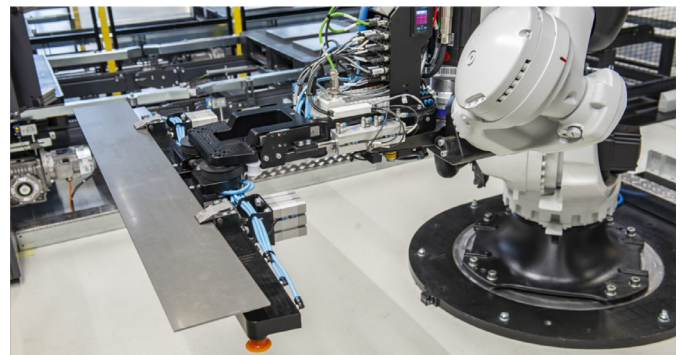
'Ulti-Form' gripper for flexible sheet metal part handling in robotic bending processes [220].
